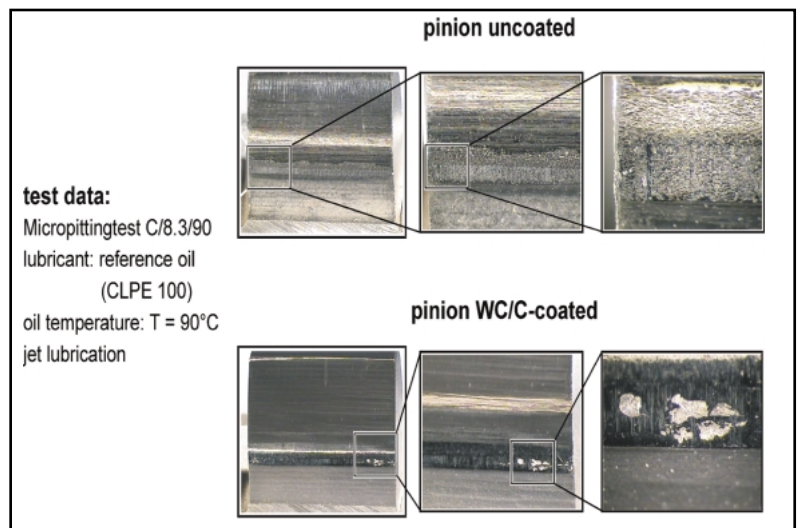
Photographs of the uncoated and WC/C-coated tooth flanks of the unmodified pinion after the end of the micropitting tests.
